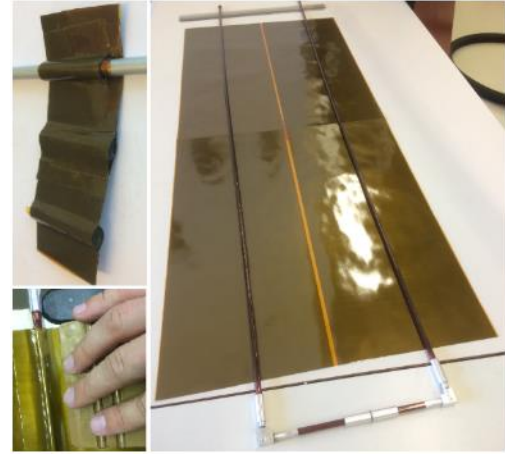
Manufacturing of FR were equipped with a Vespel® interface to the FRRS,
